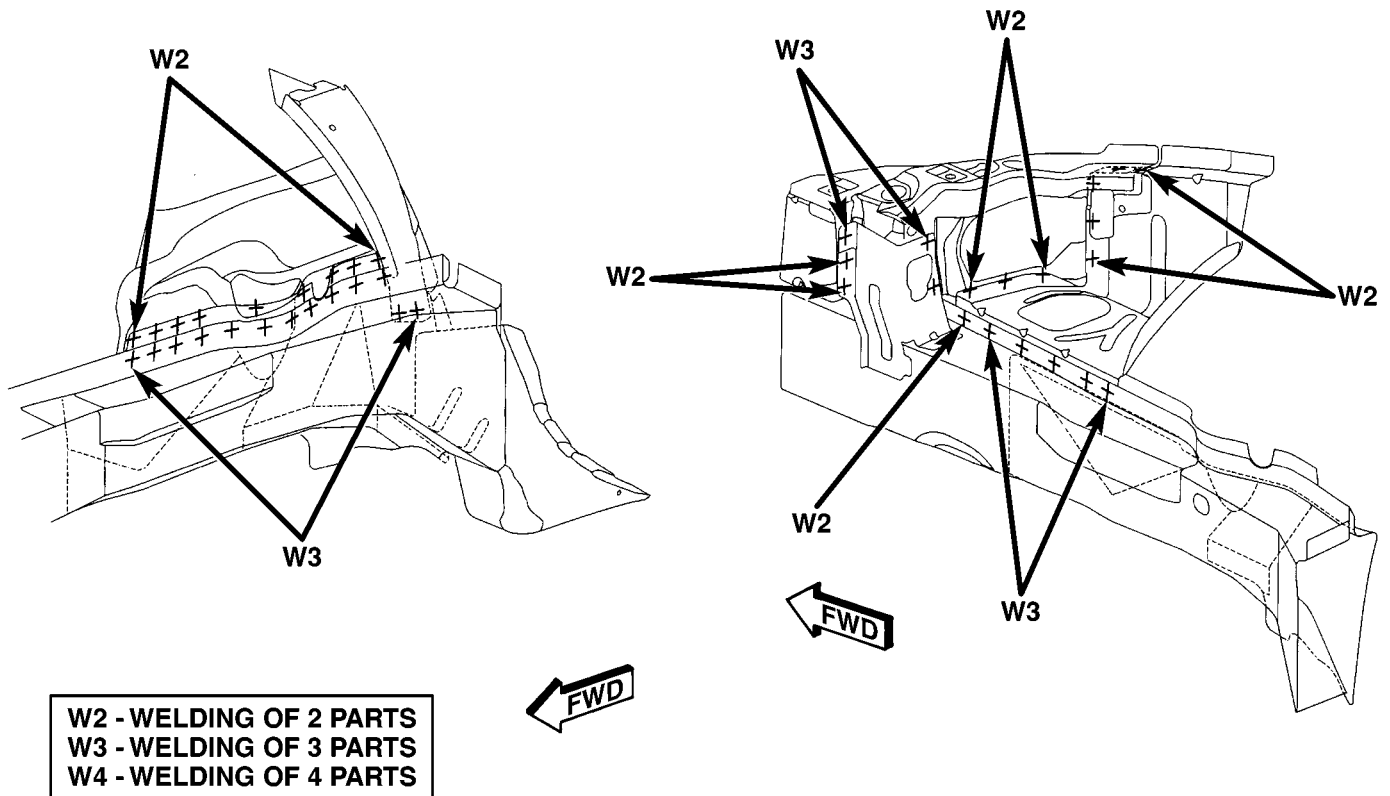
FRONT WHEELHOUSE TO FRONT SIDE RAIL AND HEADLAMP
